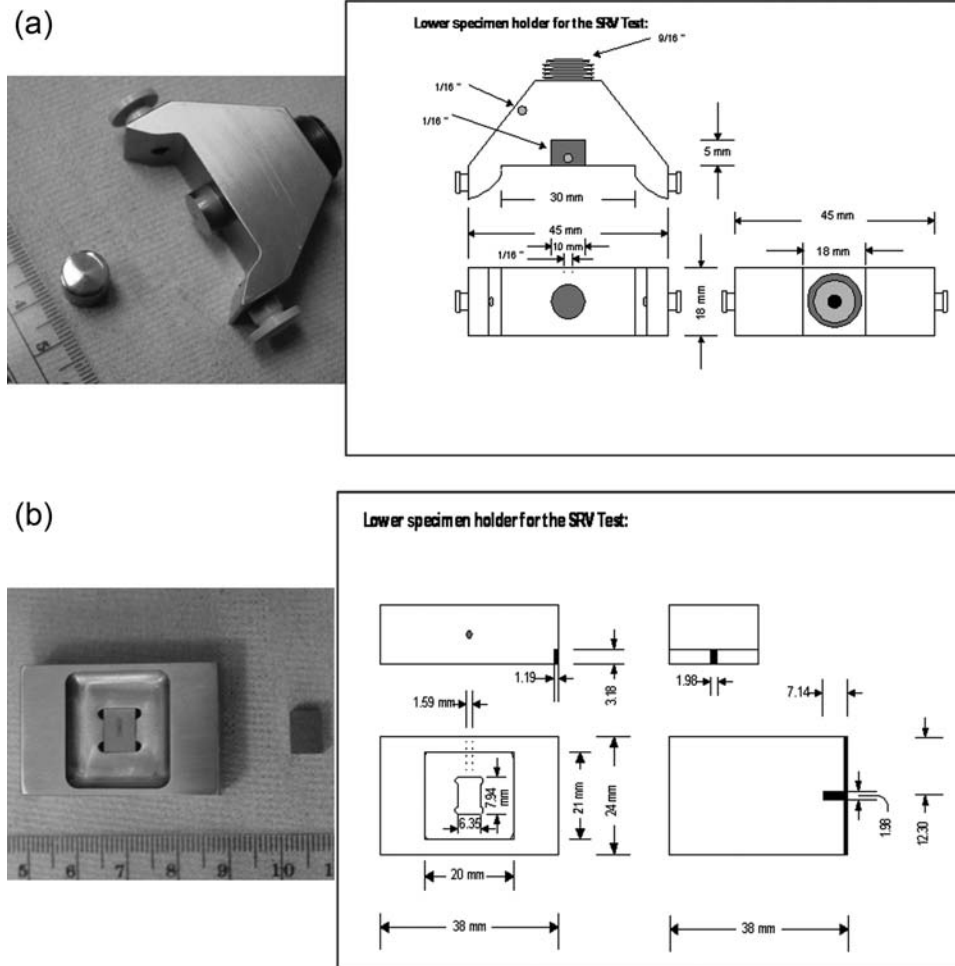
Custom specimen holders: (a) upper specimen and (b) lower specimen.
